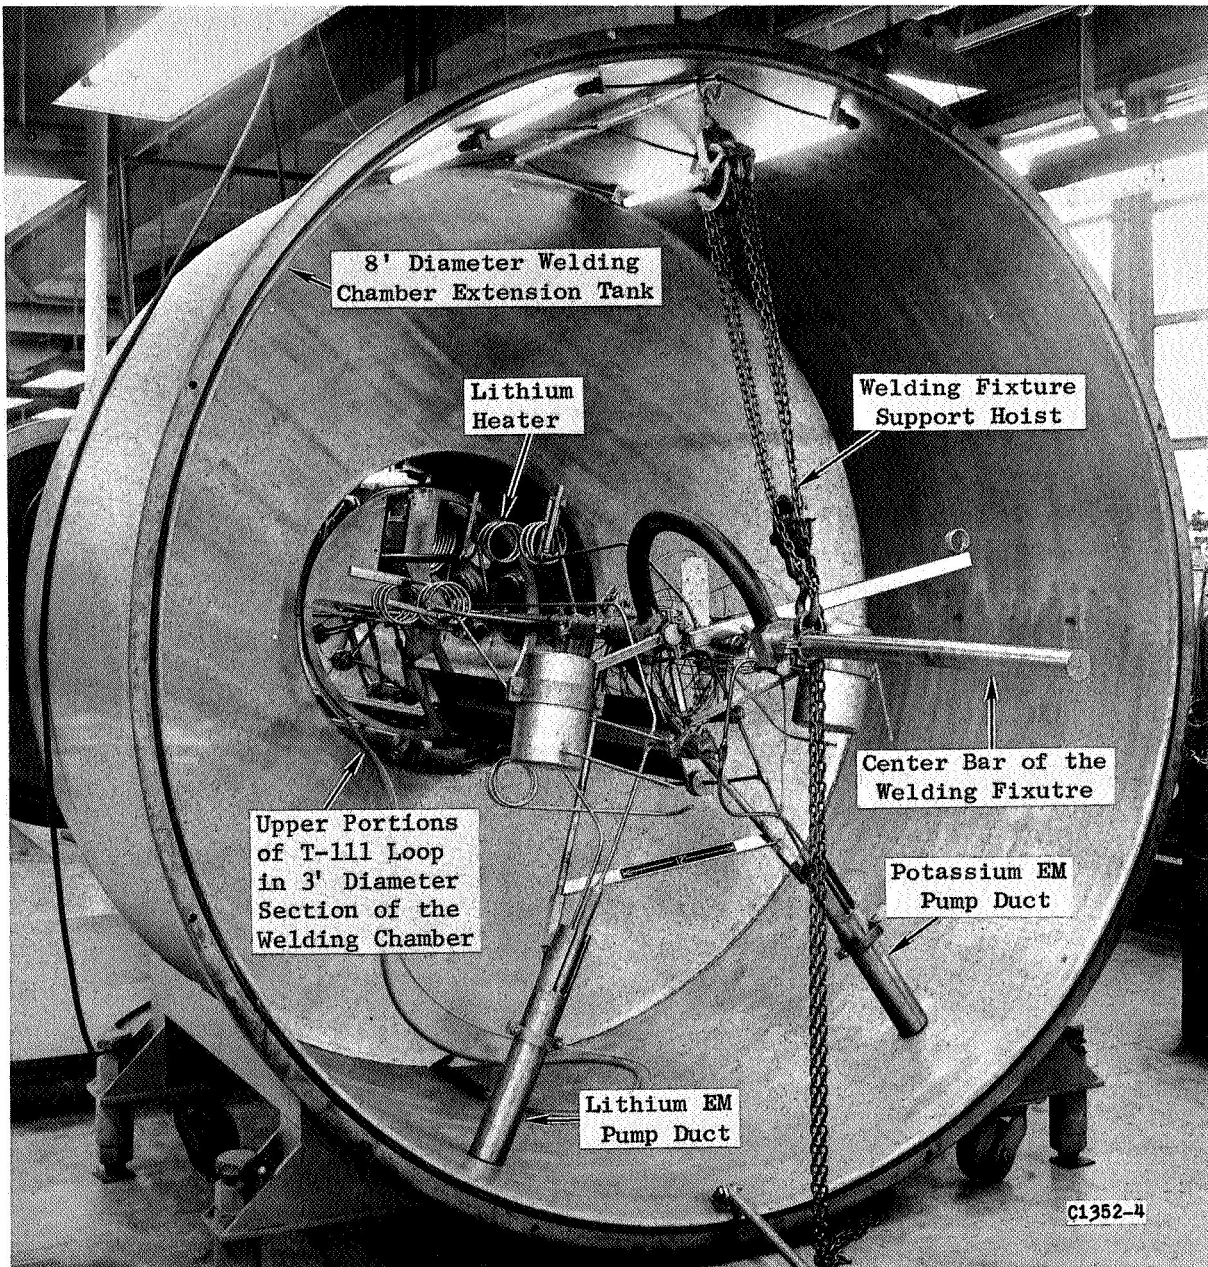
T-111 Corrosion Test Loop Mounted on the Welding Fixture Prior to Final Welding and Weld Heat Treatment Operations. (Orig. C67120714)
